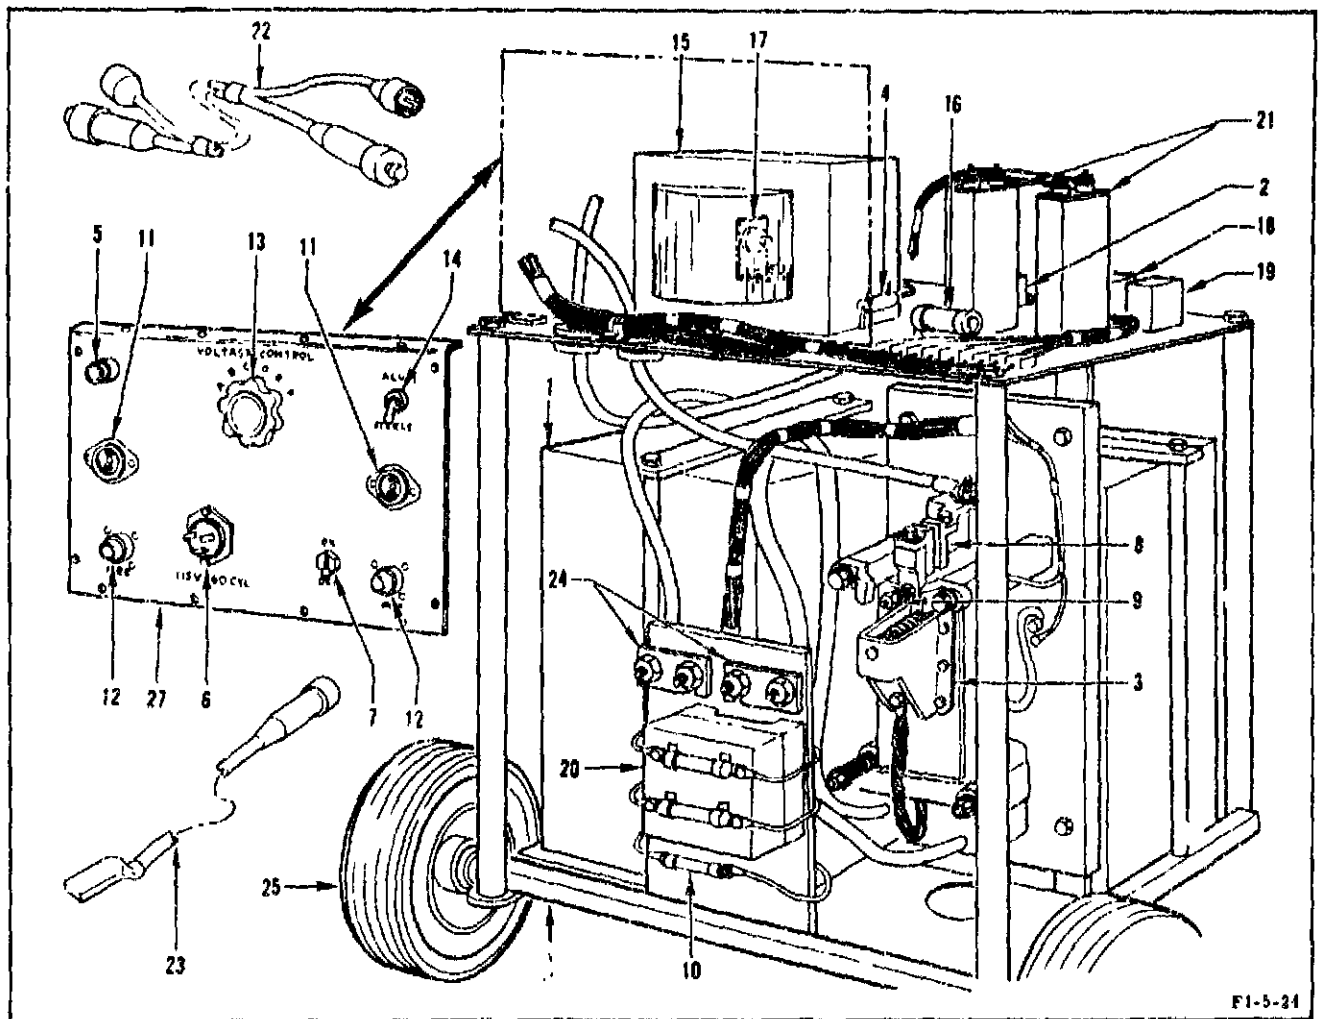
A. Components Welding Set 9026561 Alternate Part Electrical Schematic
